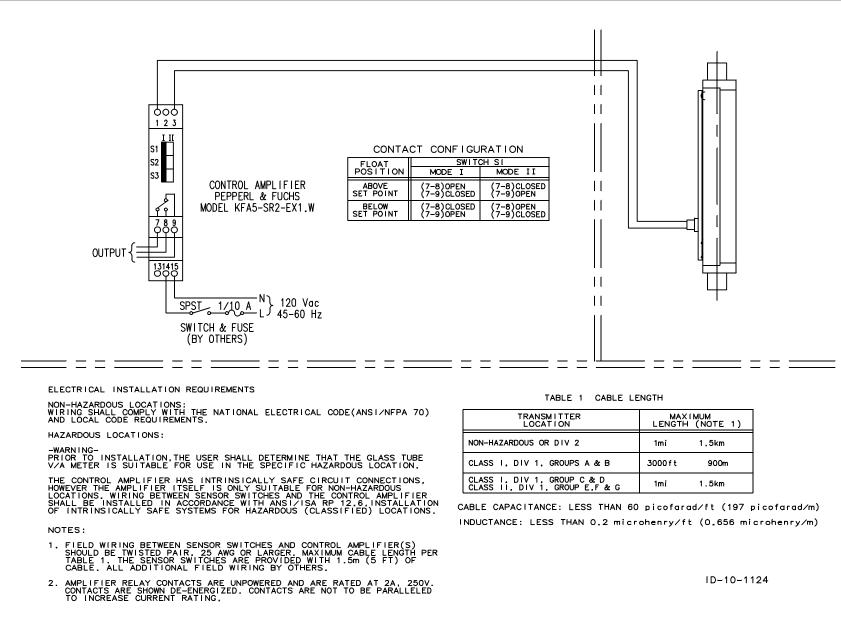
SINGLE (LOW) ALARM SINGLE POLE DOUBLE THROW RELAY OUTPUT
